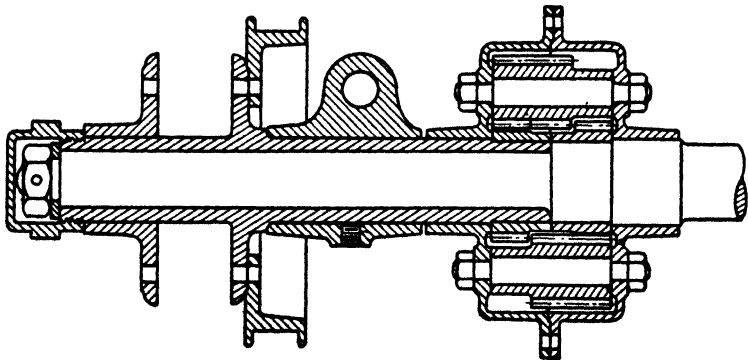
SECTION OF NON-FLOATING DRIVING AXLE (FRAGMENT).
